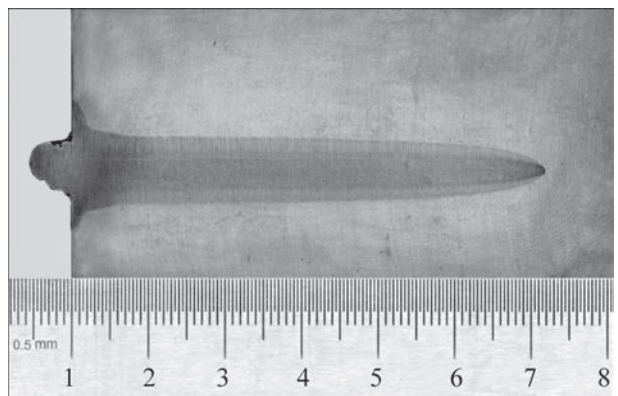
Macrosection of defect-free penetration of 70 mm depth
